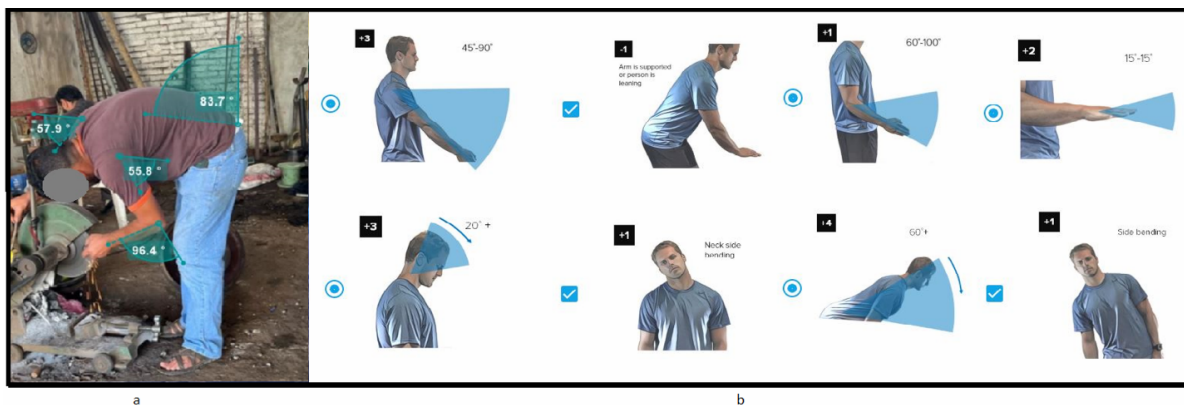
(a) An operator performing a grinding task (b) RULA assessment - grinding task
